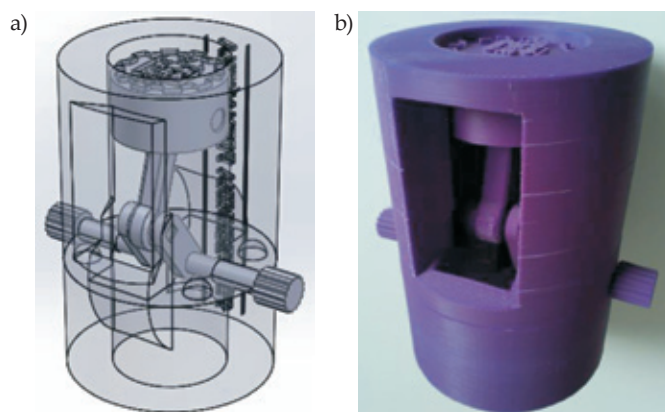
A simplified model of a reciprocating engine: a) CAD model, b) element manufactured by means of a 3D printing
